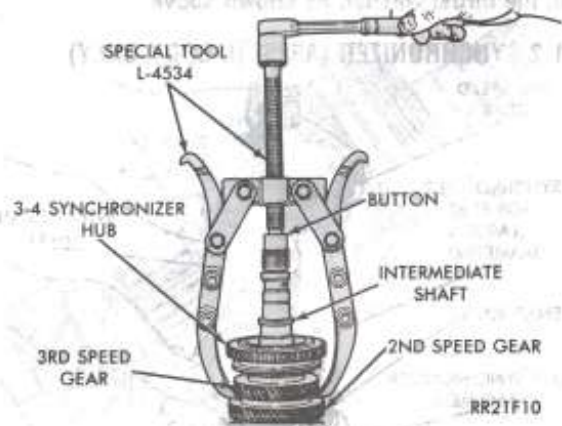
Remove 3-4 Synchronizer Hub and 3rd Speed Gear
